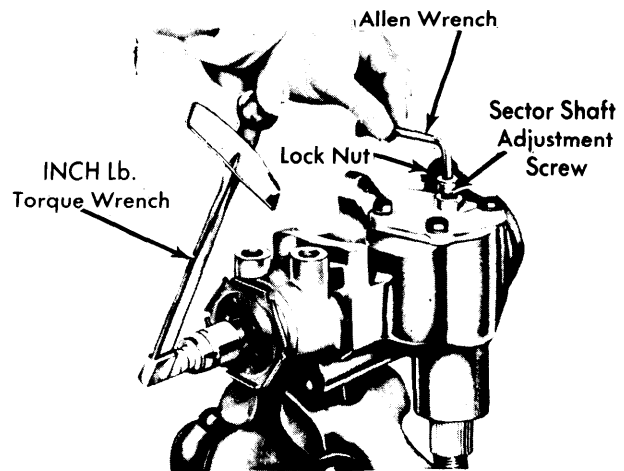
Measuring Overcenter Preload and Making Adjustment
